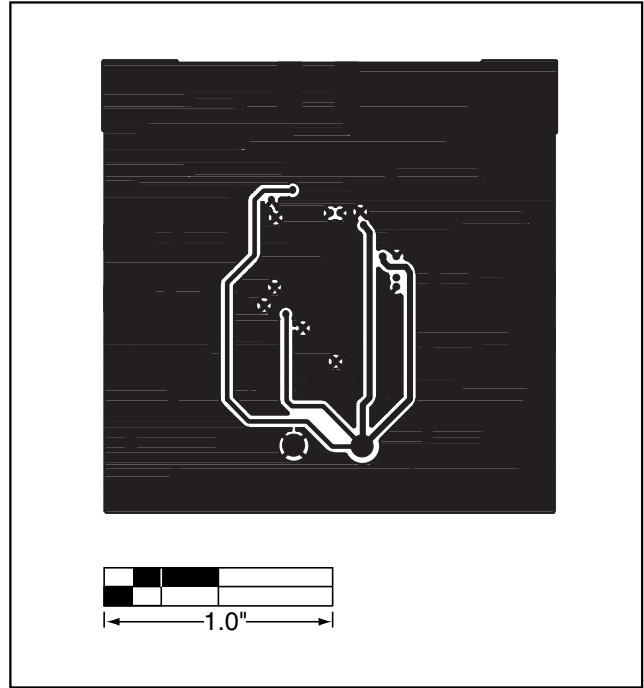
MAX9989/MAX9990 EV Kit PC Board Layout—Inner Layer 3 (Routes)
